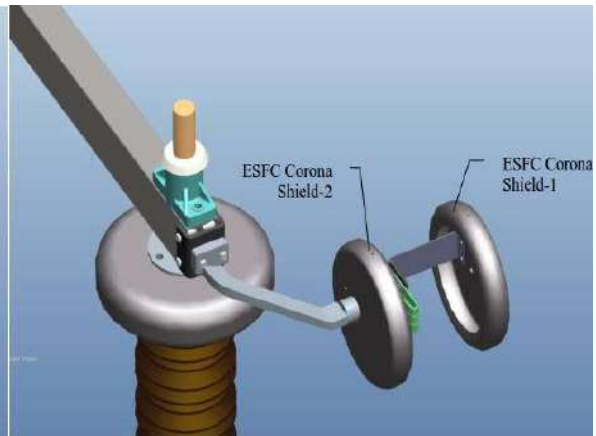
Fixed contacts corona ring mounting (Type – "A" Design)
